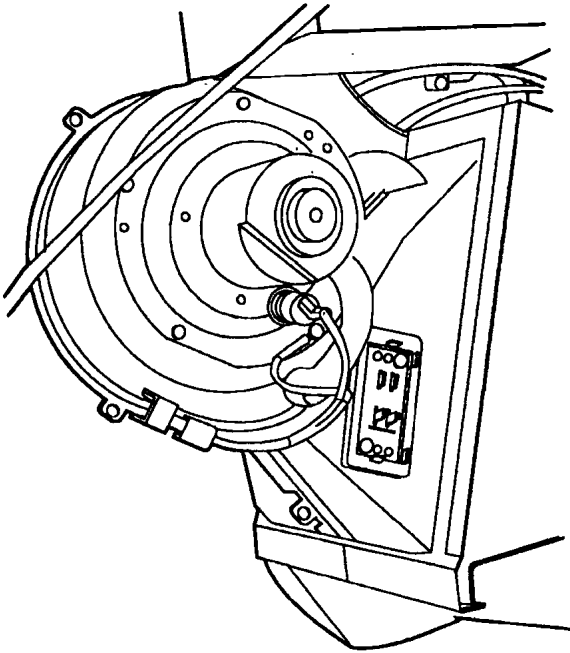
Air Blower (Typical Blower Assembly for 2000/4000/8000 Models)
